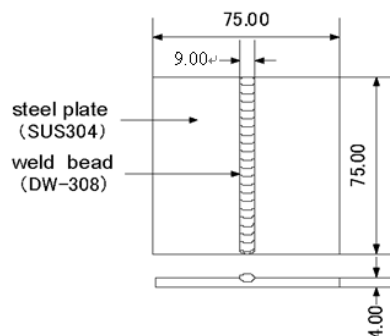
SUS304 specimen with bead on plate welding
